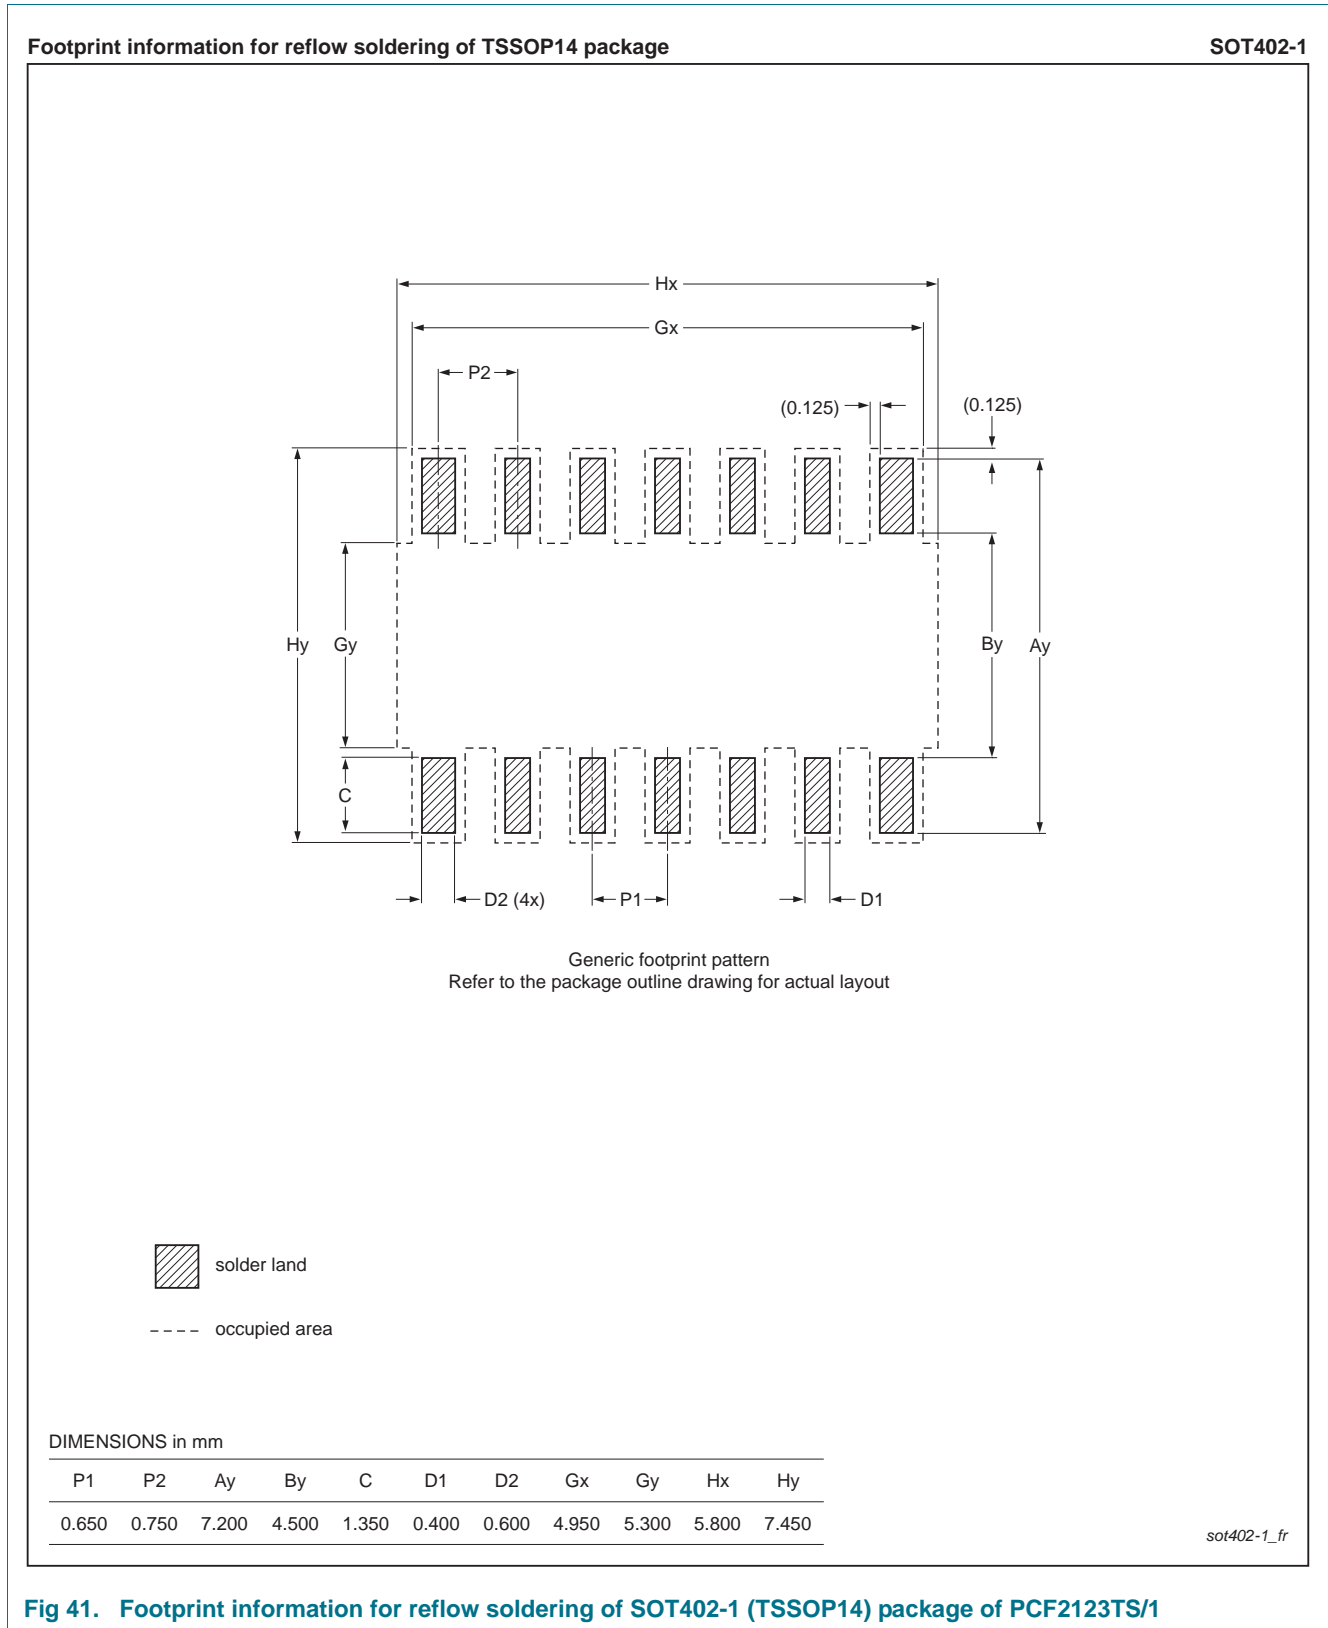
Footprint information for reflow soldering of SOT402-1 (TSSOP14) package of PCF2123TS/1
